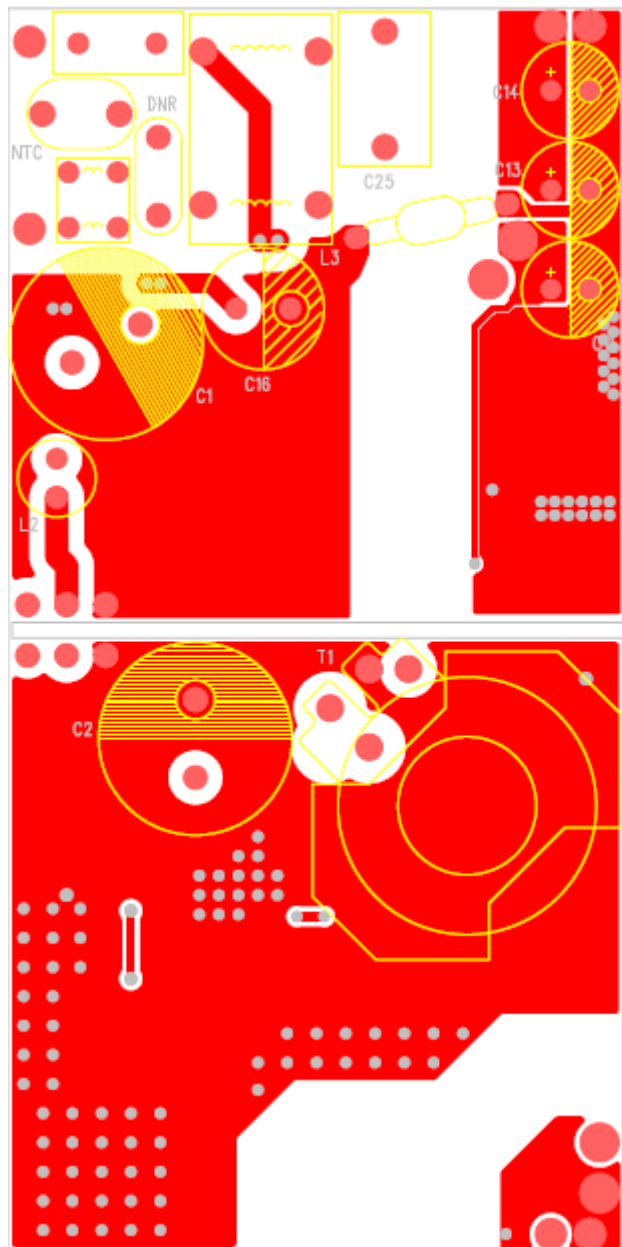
, Top View of NCP1340+NCP43080_5V8A's PCB
